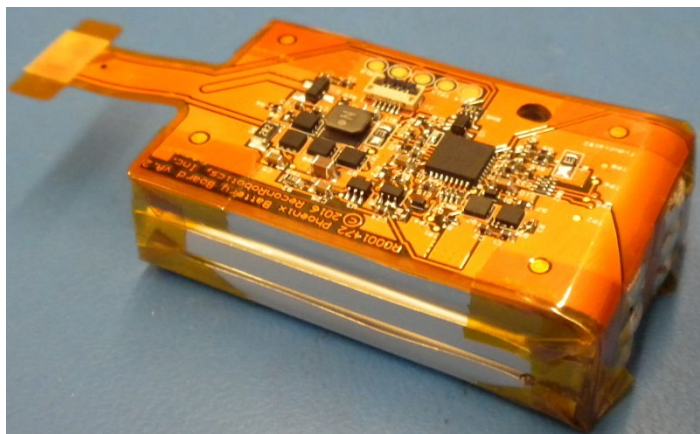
Battery Board installed in Battery Assembly (heat shrink removed)
